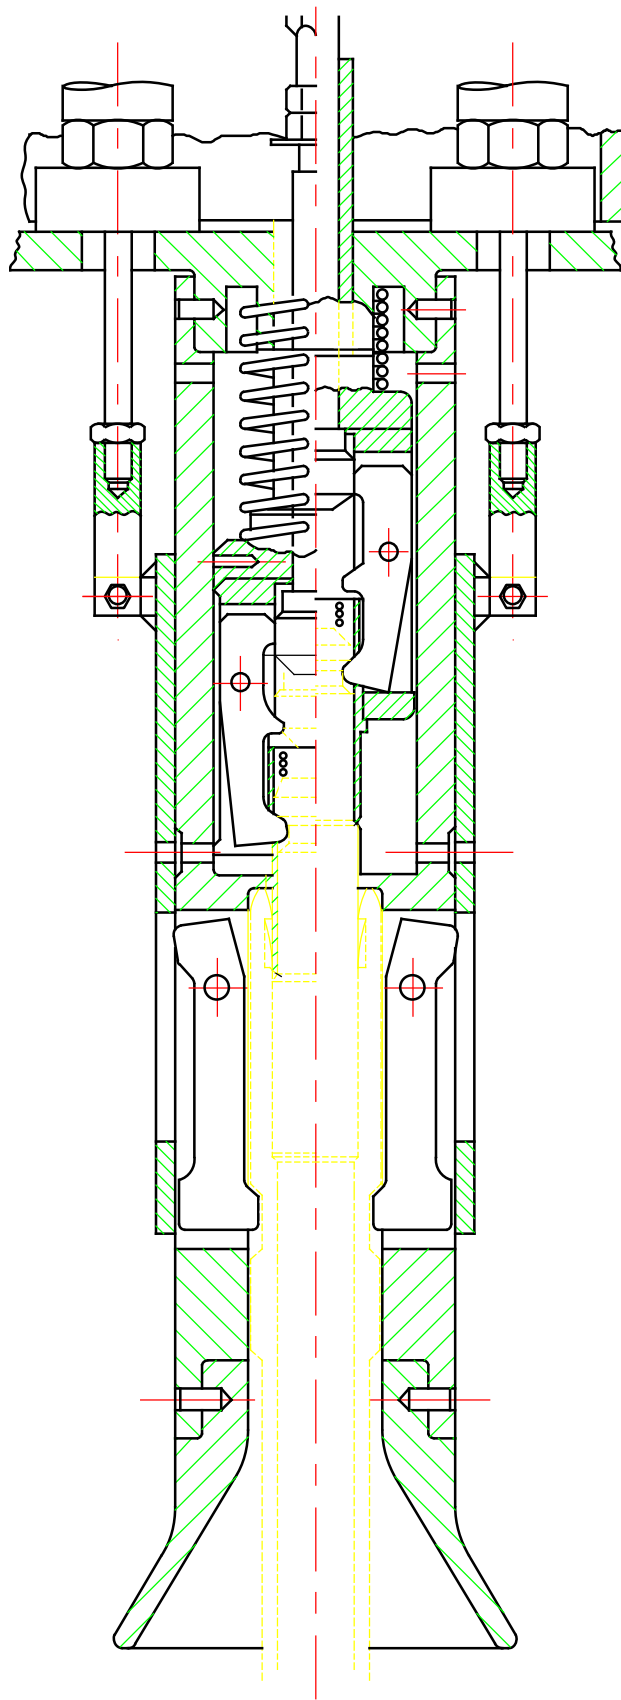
Rod Drive Shaft Unlatching Tool
